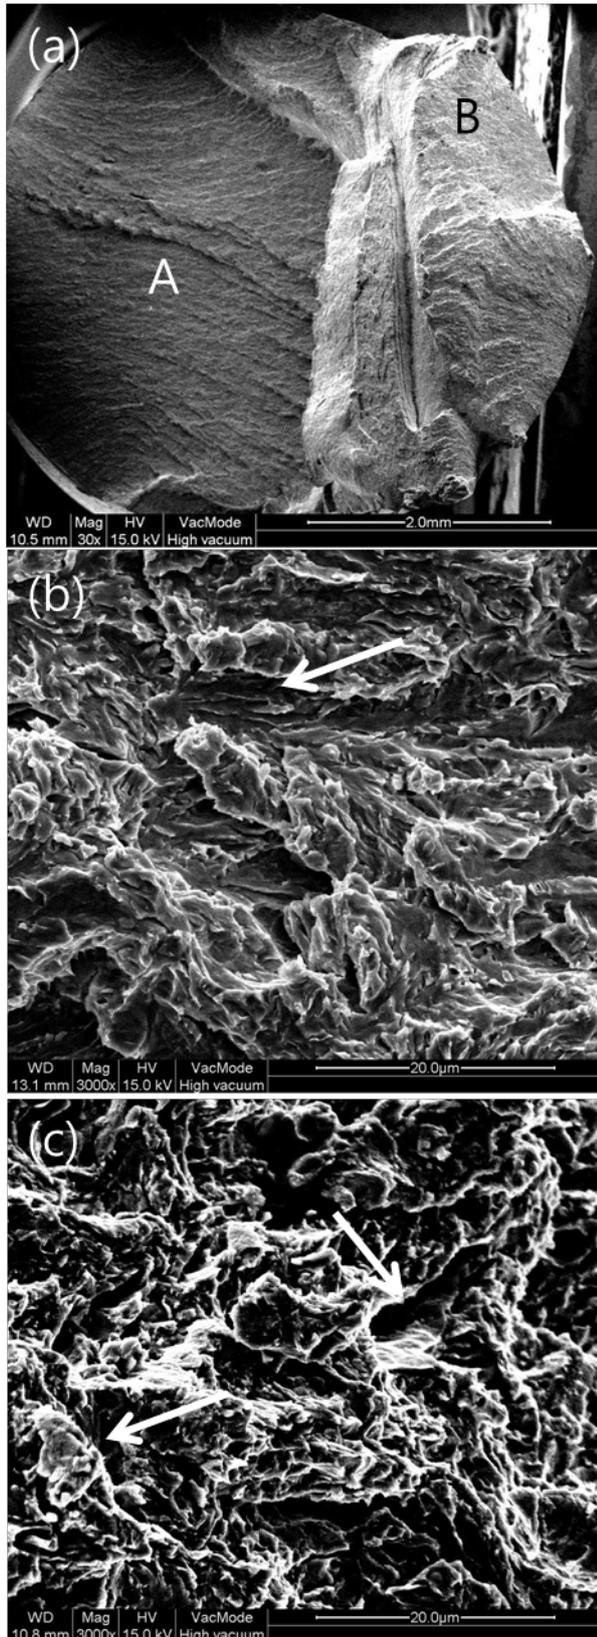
Fracture surfaces of a specimen of API X70 steel tested in 100% Hydrogen.
